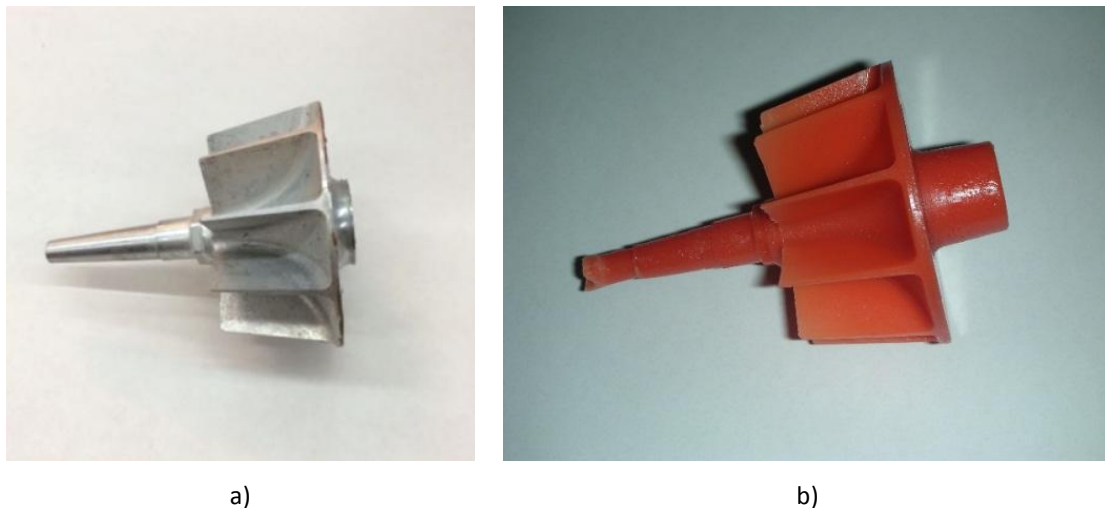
Designed turbine: a) Milled master part and b) Wax pattern.
